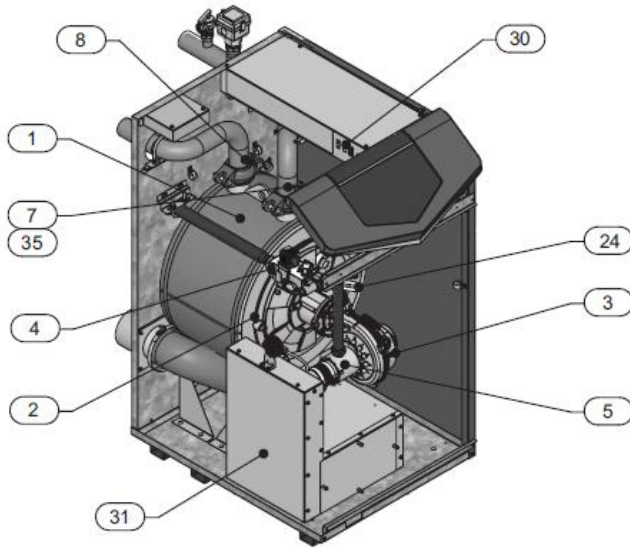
HERALD MODEL HCB117 EXPLODED VIEW.
